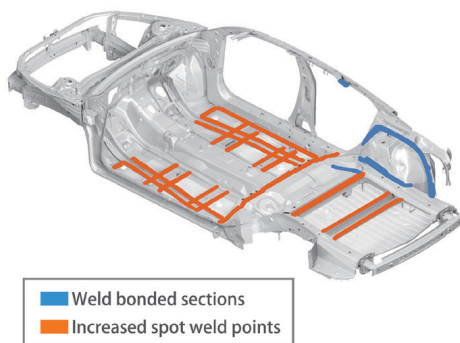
Weld Bonding, Increased Spot Weld
